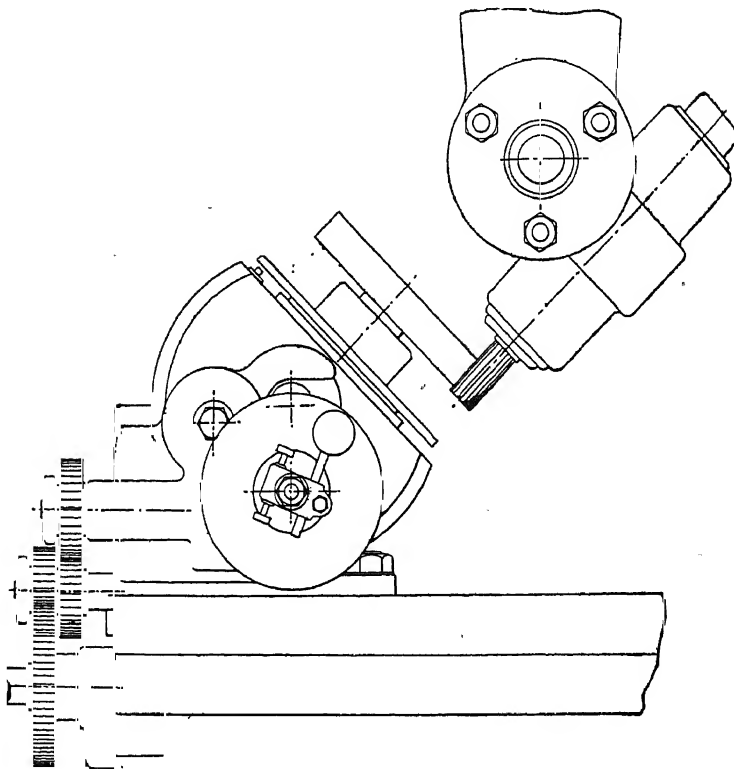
Accurate method of generating cam by gearing spiral lead to table screw.
